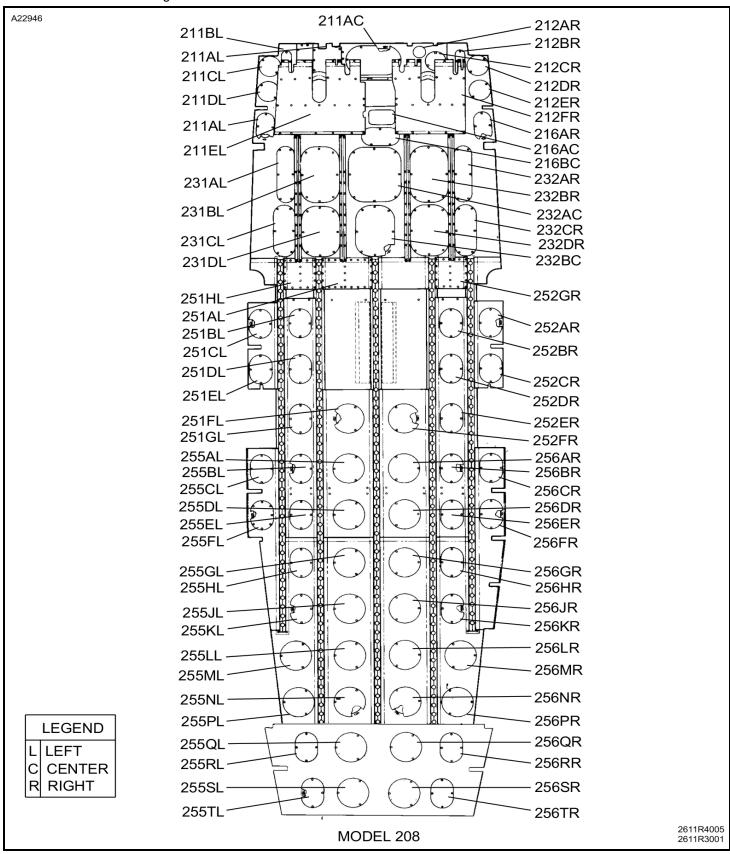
Sheet 1: Model 208 Floorboard Access Plates/Panels Identification
